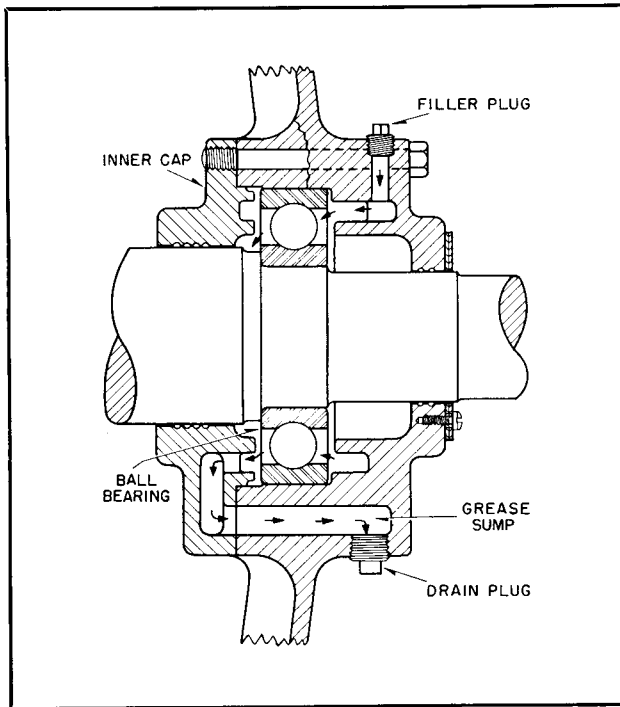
Typical Ball Bearing (Grease Lubricated)
